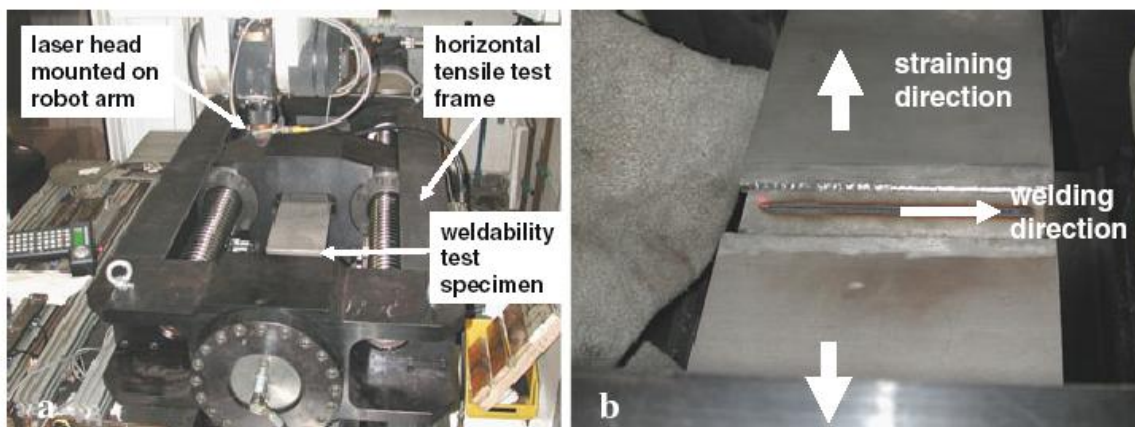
Controlled Tensile Weldability (CTW) test fixture showing overview of (a) test frame and (b) test specimen
